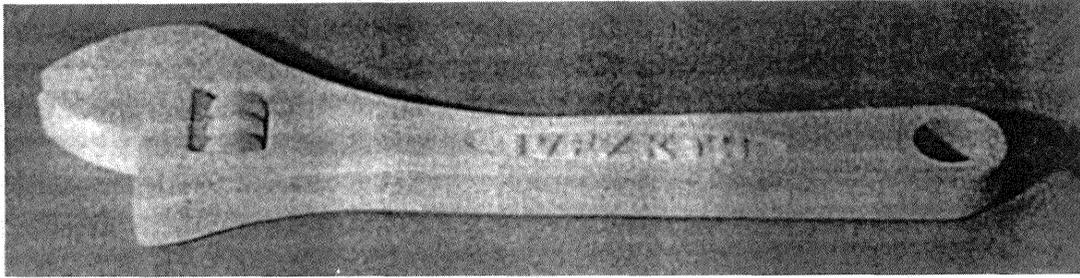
A wrench, built as one assembly in the SLS machine at IVF-KTH
